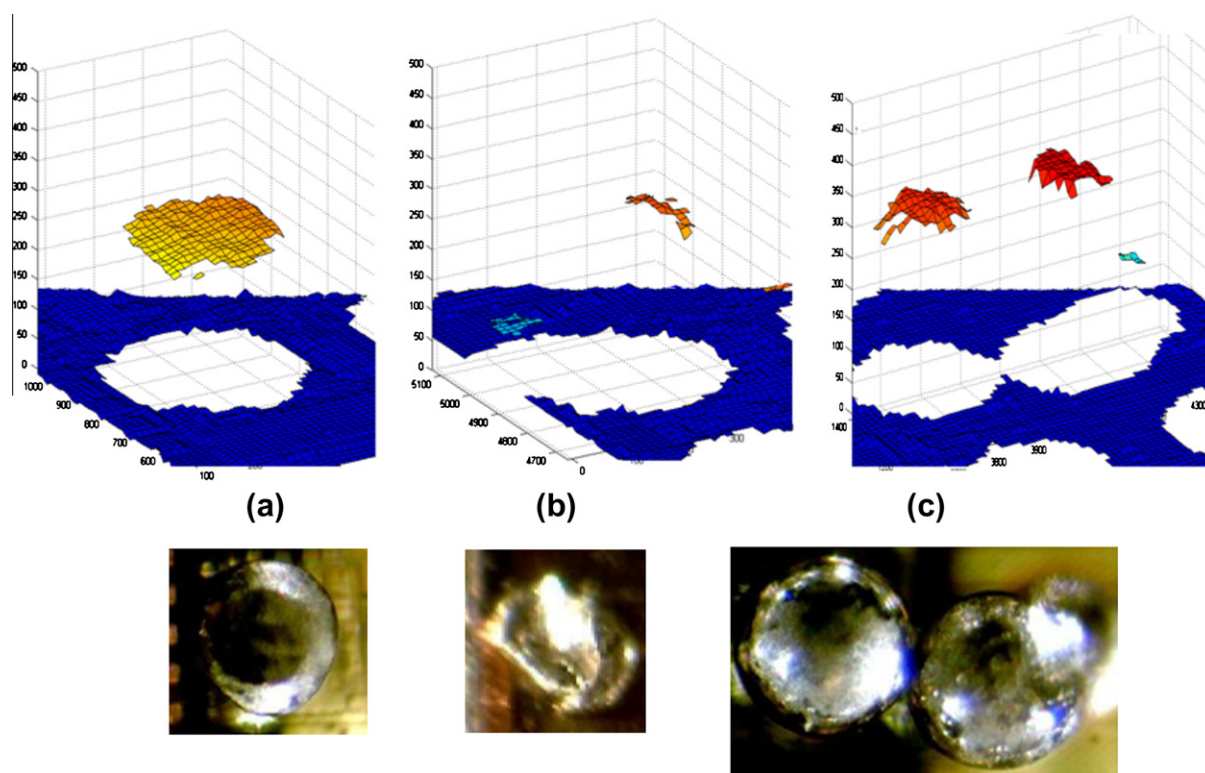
2D and 3D view of solder ball defects (a) flat top, (b) incomplete sphere, and (c) incorrect grid location [82].
